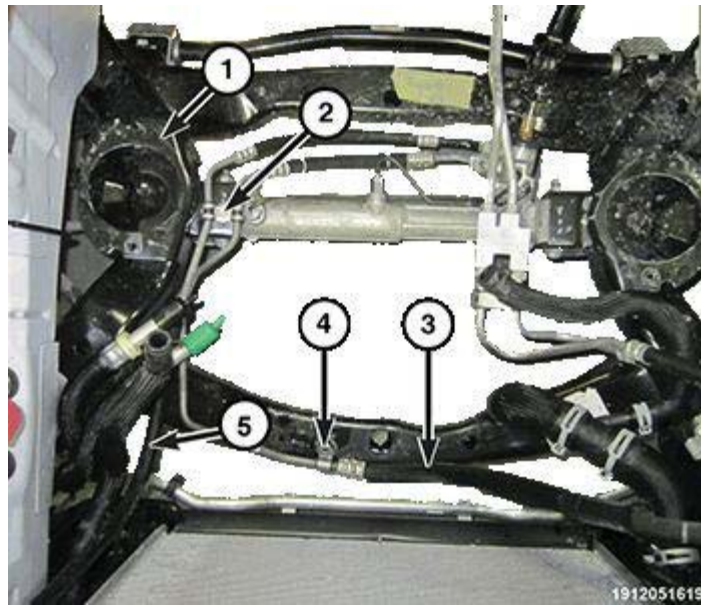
Engine Cradle, Fasteners, Pressure Hose & Return Hose
